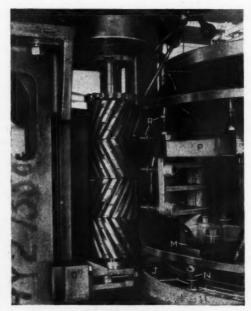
Close-up view of the cutters for milling the facings on the Avon thrust reverser box. A steady bracket to support the end of the cutter arbor has been added to the machine by Rolls-Royce, Ltd.
